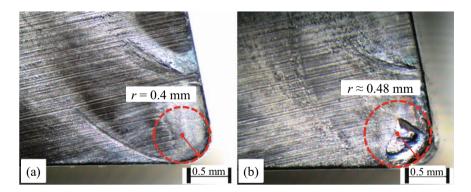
Measurements of tool nose radius and surface condition of CVD  $TiCN/Al_2O_3$  composite ceramic carbide insert a before and b after machining
